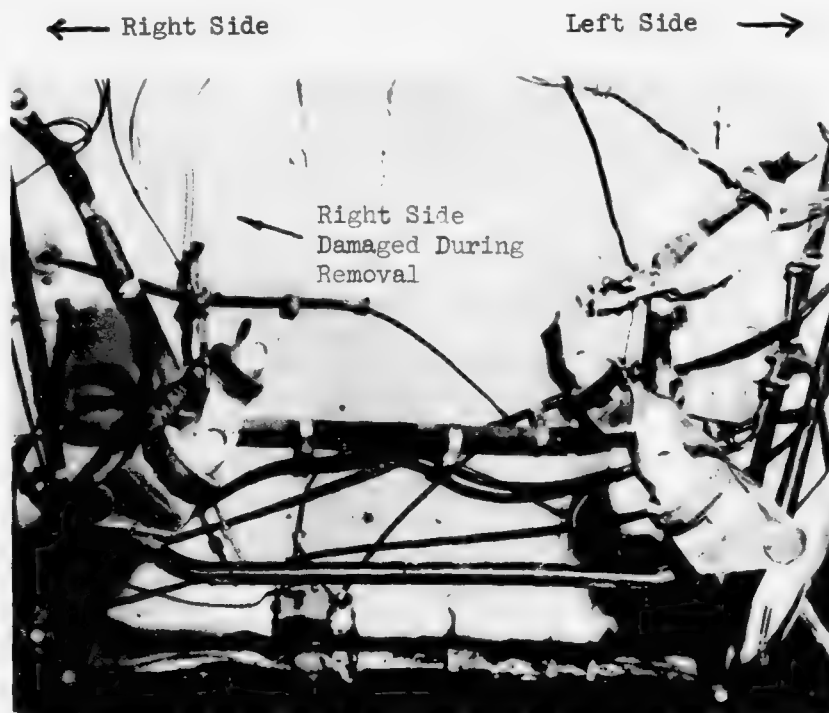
Front View of Engine Mount Failure, Left Side (Airplane B)
